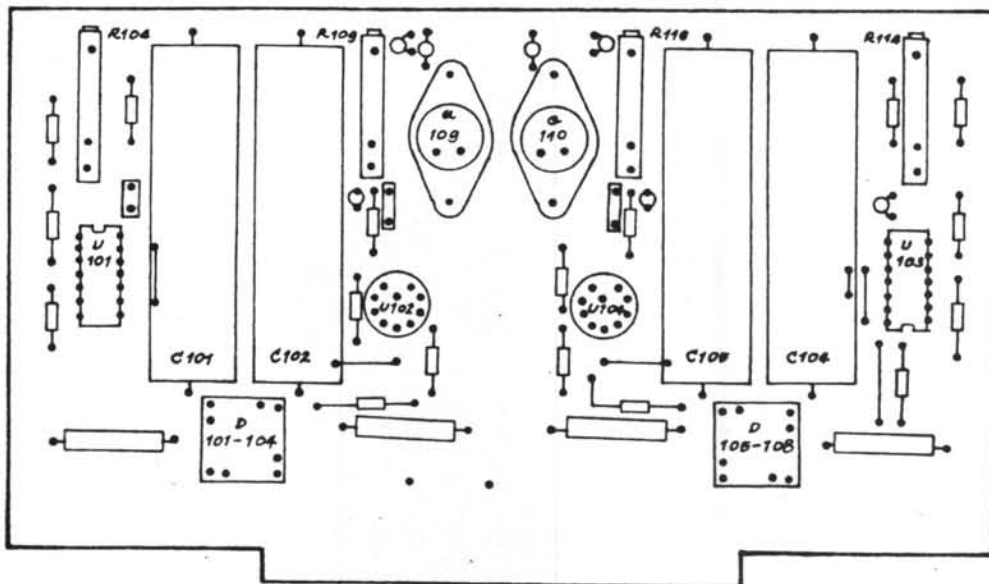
Power supply - 2 (AS:5) ; Components lay out
